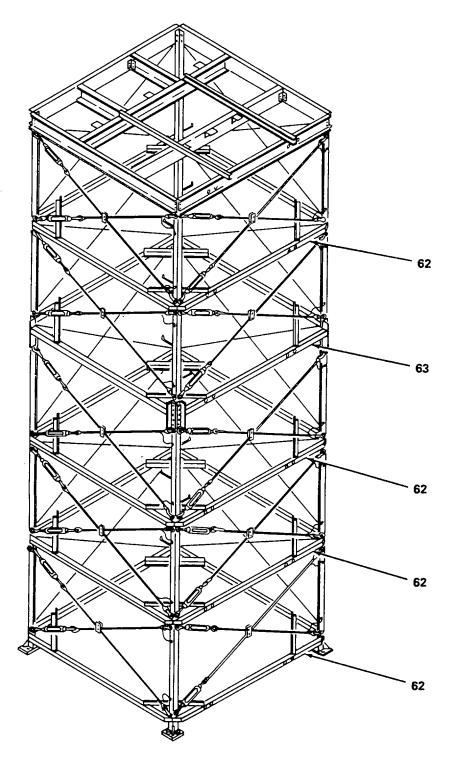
Tower Assembly Kit (Sheet 5 of 6)
